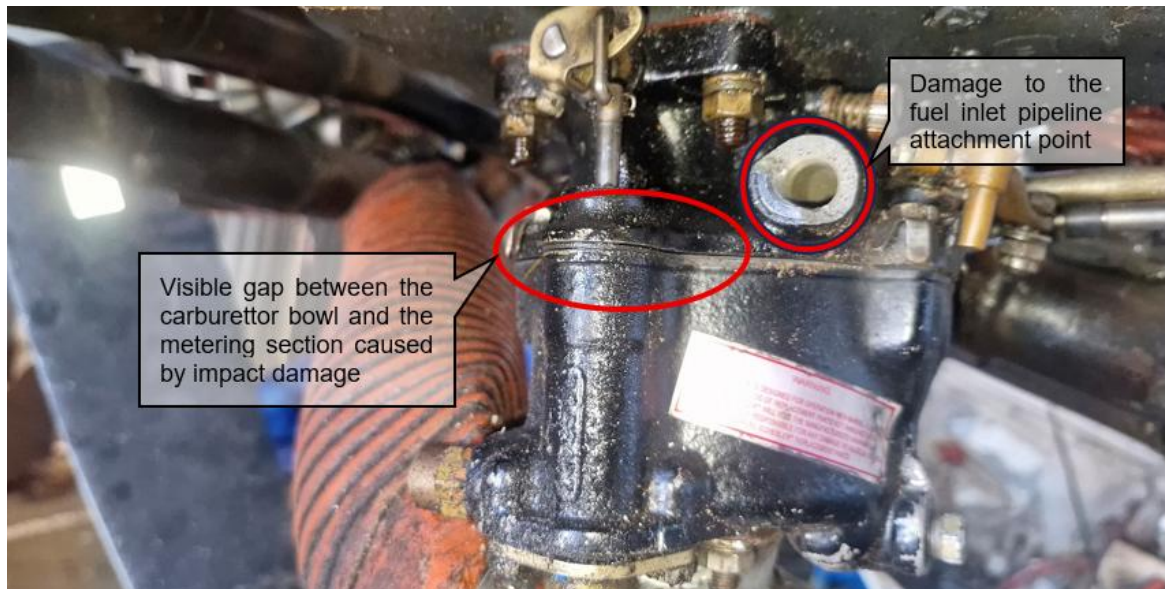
The damage to the carburettor's left side and the fuel inlet attachment points.
